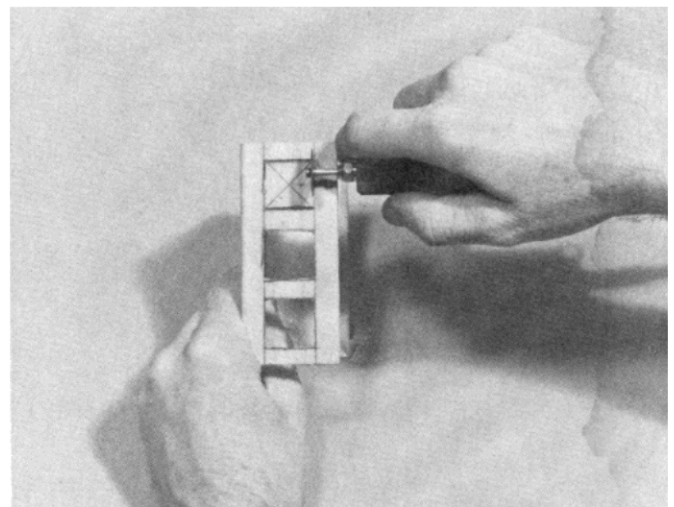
15/16" square holes are required for the receptacles. These are most easily cut using a nibbler tool or dremel mototool with a cutting wheel.
